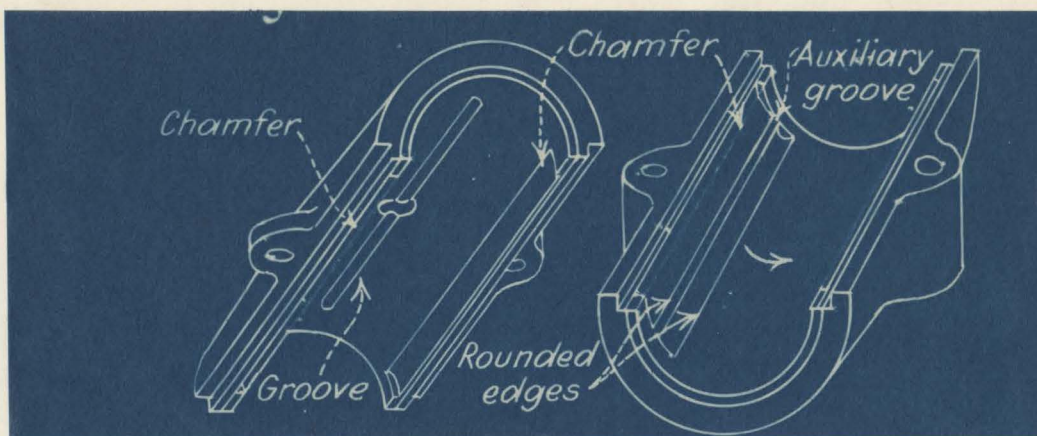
Grooving in a Heavily Loaded Bearing, Showing the Auxiliary Groove Just Ahead of the High Pressure Region.
